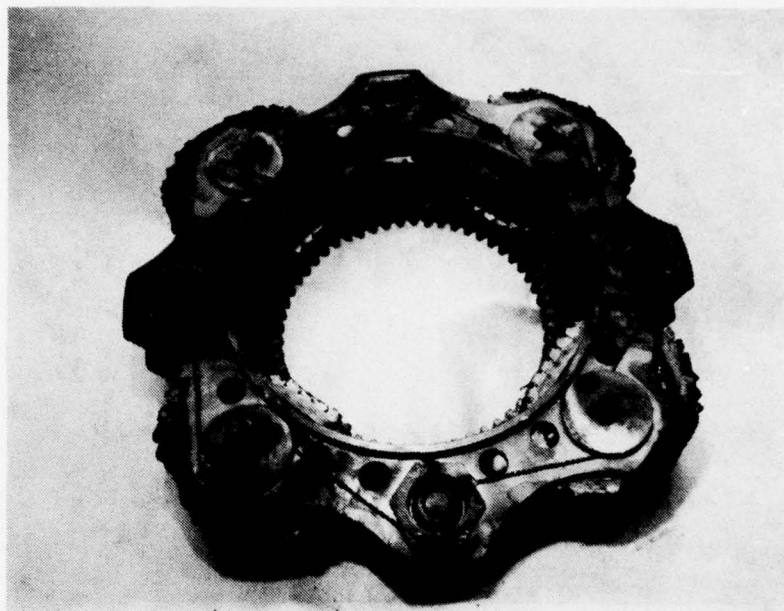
Lower planetary assembly after fourth loss-of-lube test.
